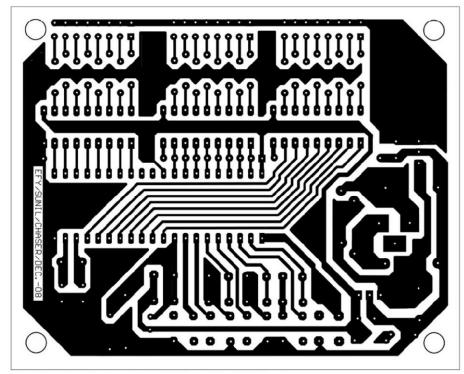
A single-side, actual-size PCB layout for LED light chaser
